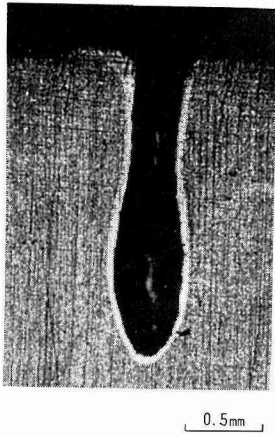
Surface layer caused by laser machining. output 6.3J $\ell=0.0$
